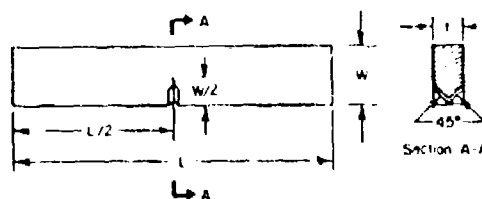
SLOW BEND FRACTURE TOUGHNESS SPECIMEN
